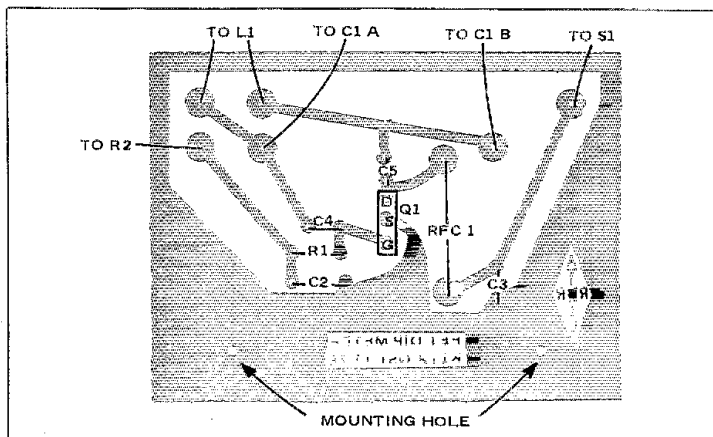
Parts-placement diagram showing where parts should be installed on the pc board. The etching pattern appears in the "Hints and Kinks" section of this issue. The above view is from the nontool or component side of the board.
